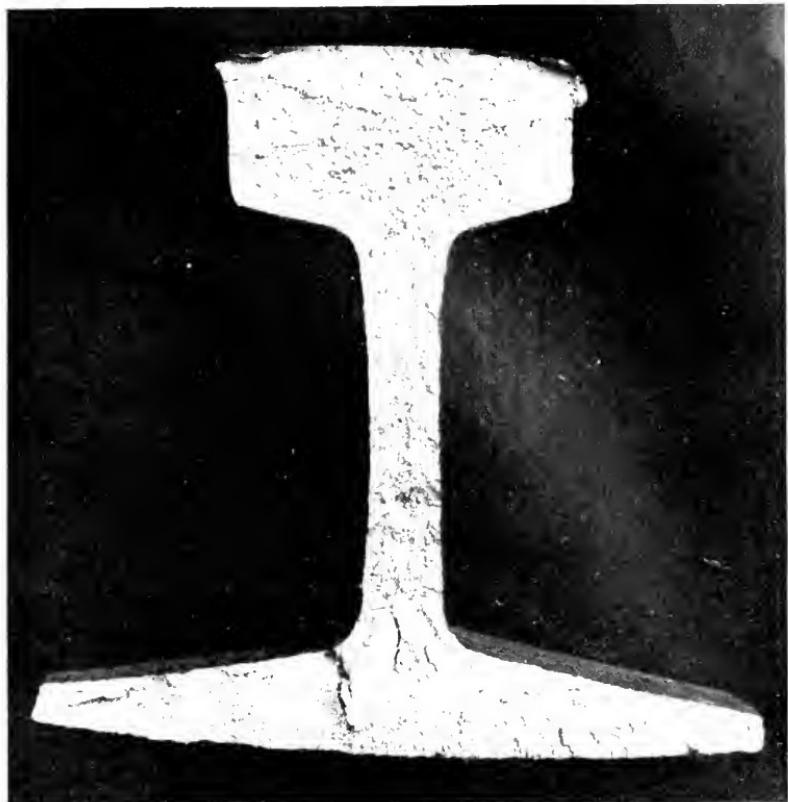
End View of a Rail Fractured in the Testing Machine, showing Flow of Metal at Running Surface of Head due to Wheel Pressures.
